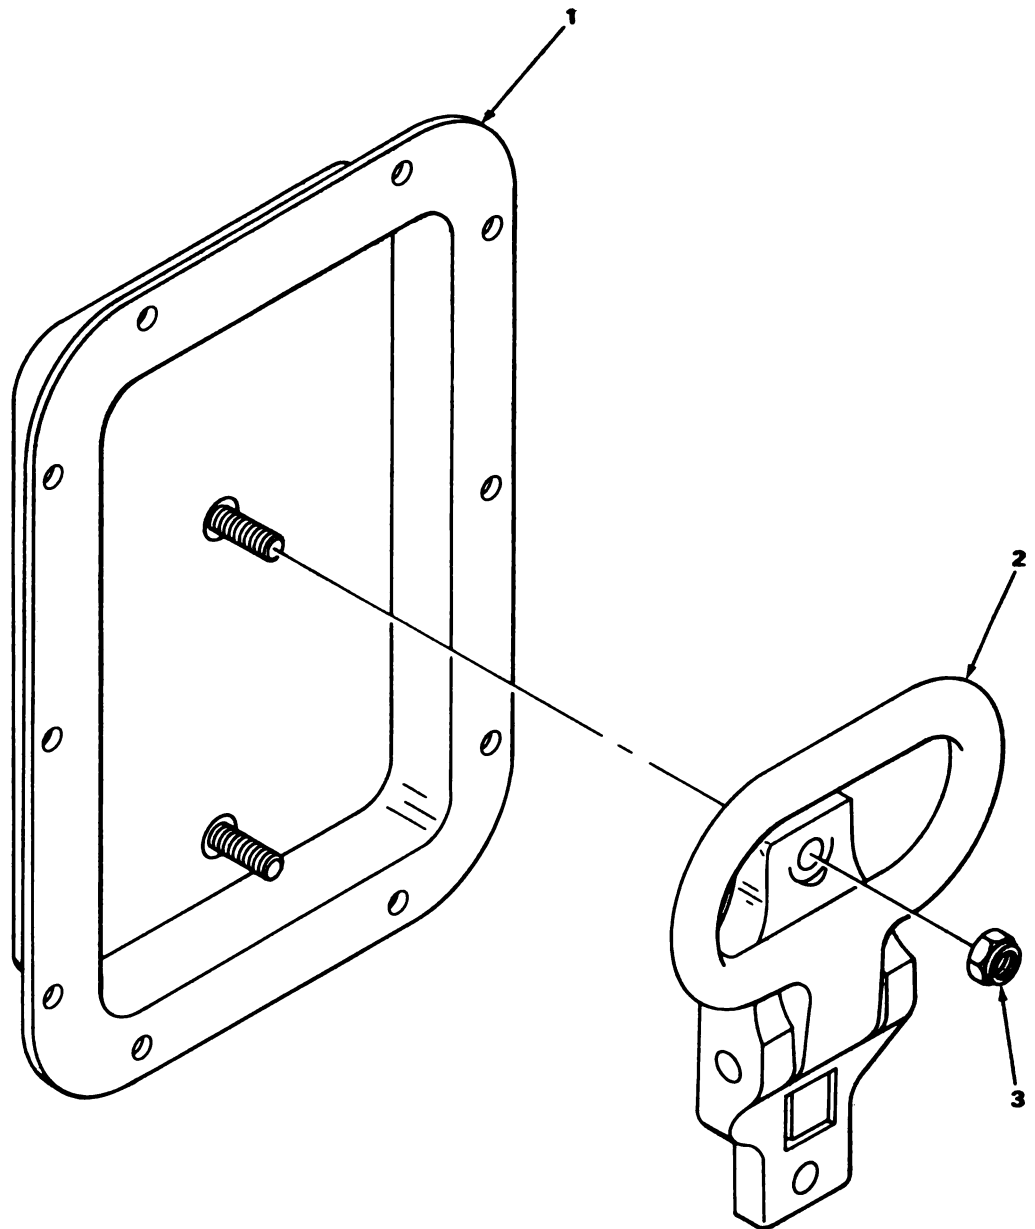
DOOR BRACE ASSEMBLY (SHEET 1 OF 2).
